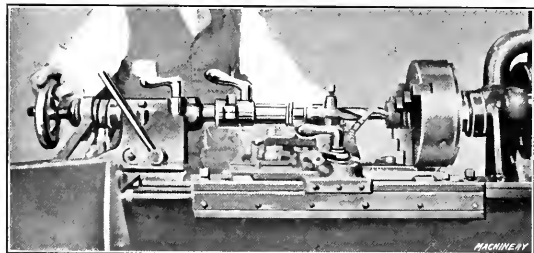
"Satco" Drill Holder performing a Drilling Operation
